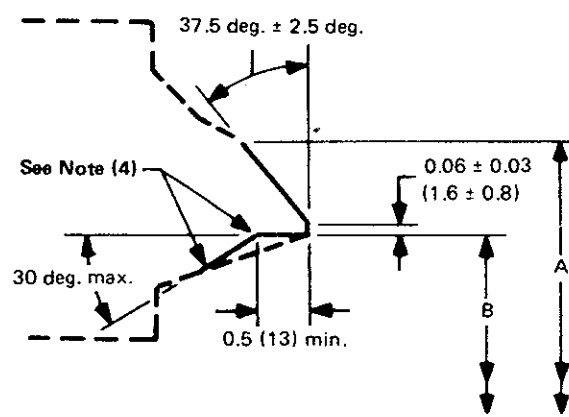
(5) Welding End Detail for Joint Using Split Rectangular Backing Ring.
